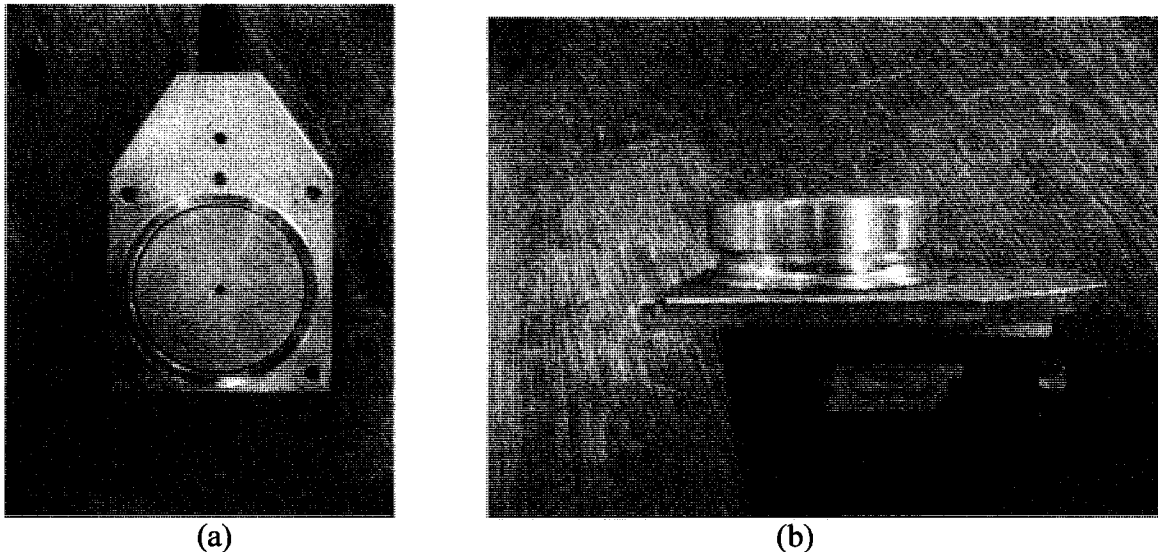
Load cells, load bearing plates and mounts: (a) front view; (b) side view. (see Fig. 4.21 for scale)
